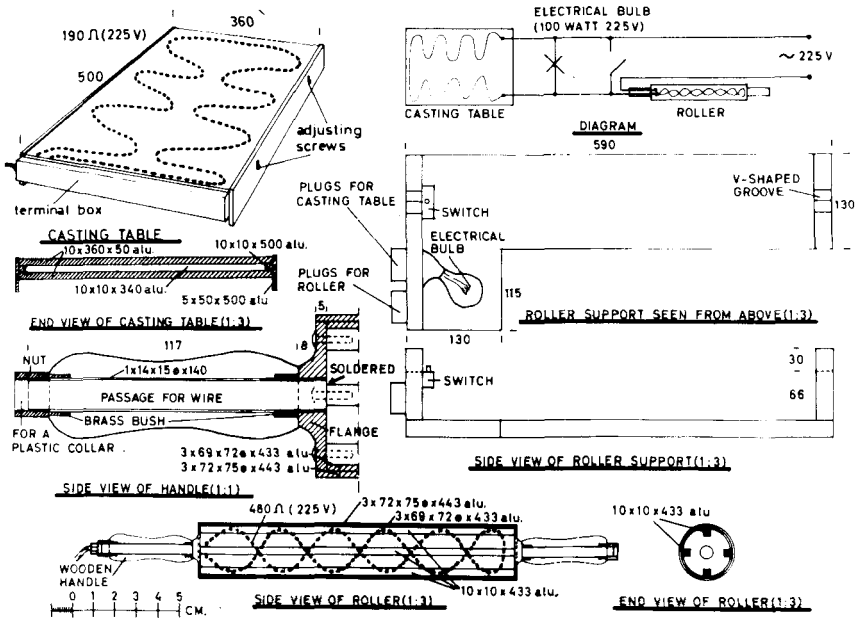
Design of the apparatus for wax plate casting. The dimensions are indicated in accordance with the scale in the lower left corner.
